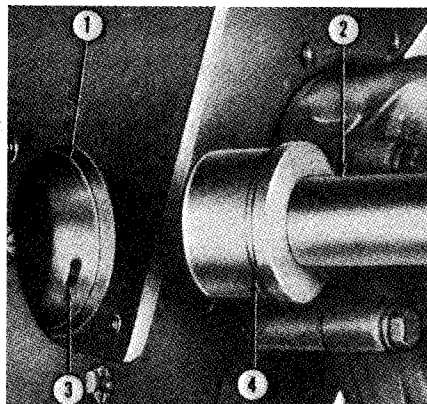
View showing special tool for camshaft bearing installation. Be sure that bearings are installed with oil holes aligned with oil passages in cylinder block.
